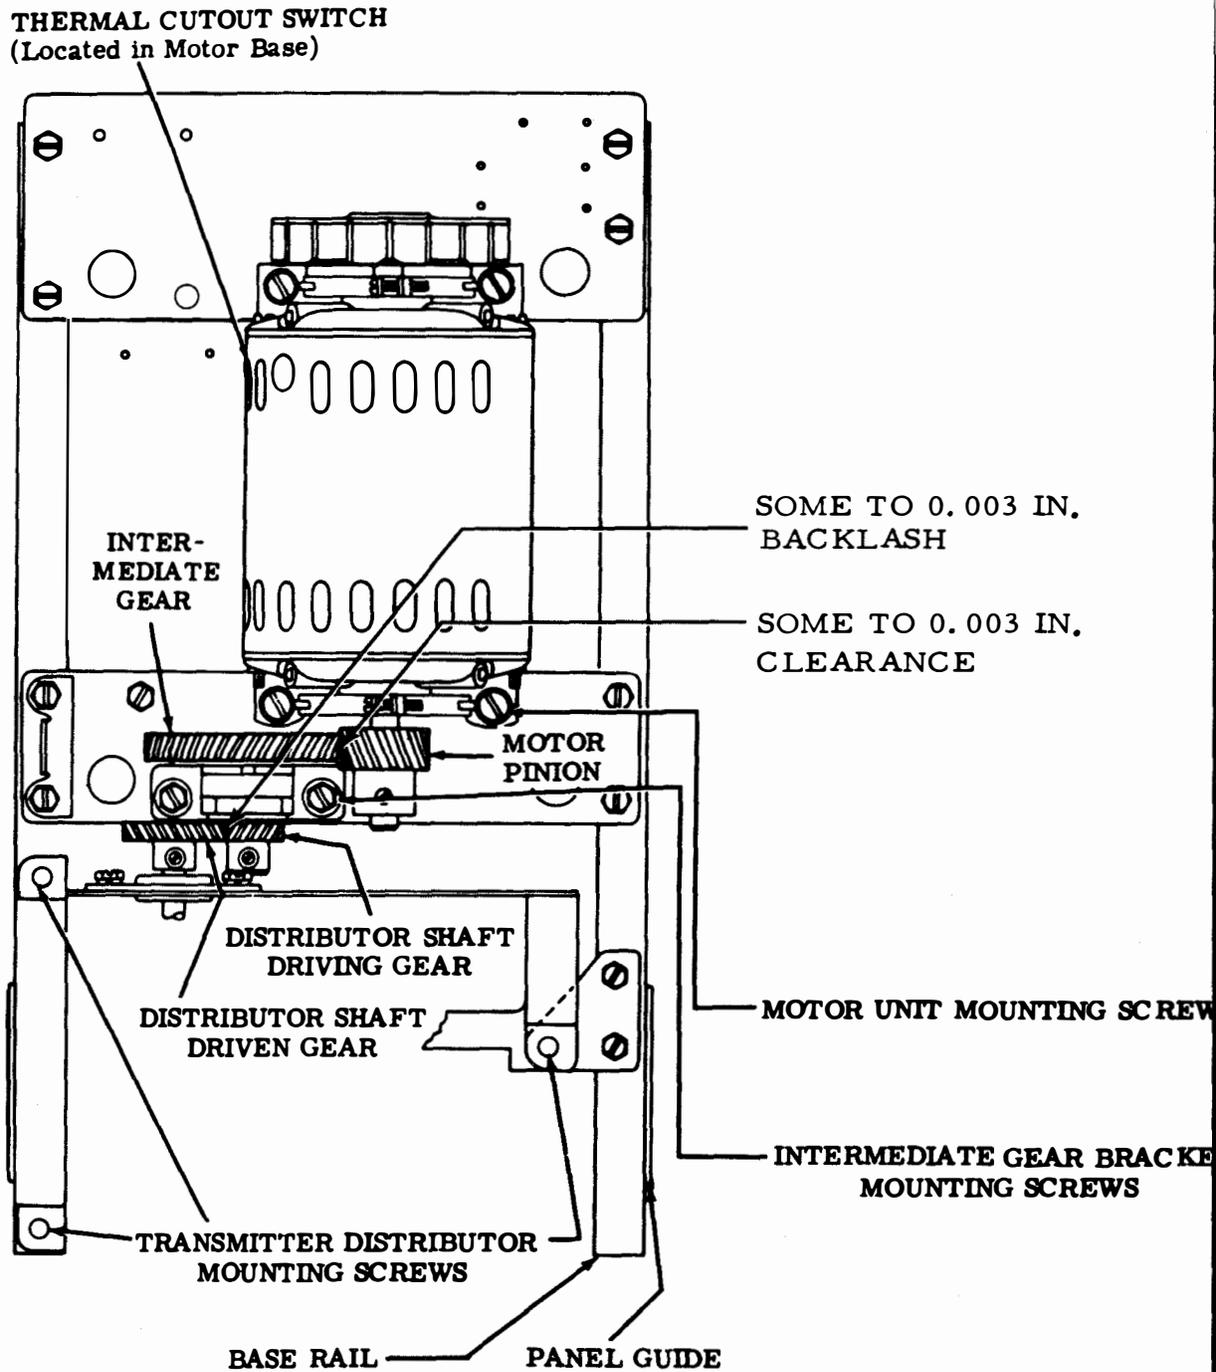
Intermediate Gear Assembly and Motor Pinion
